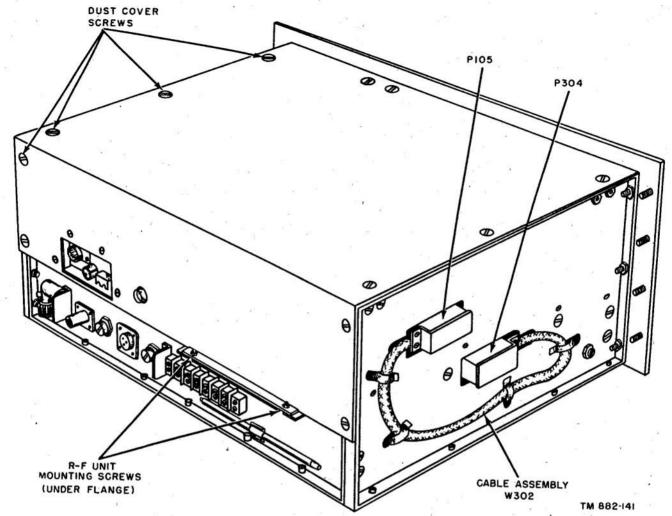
Radio Receiver R-220/URR, showing dust cover removal.
